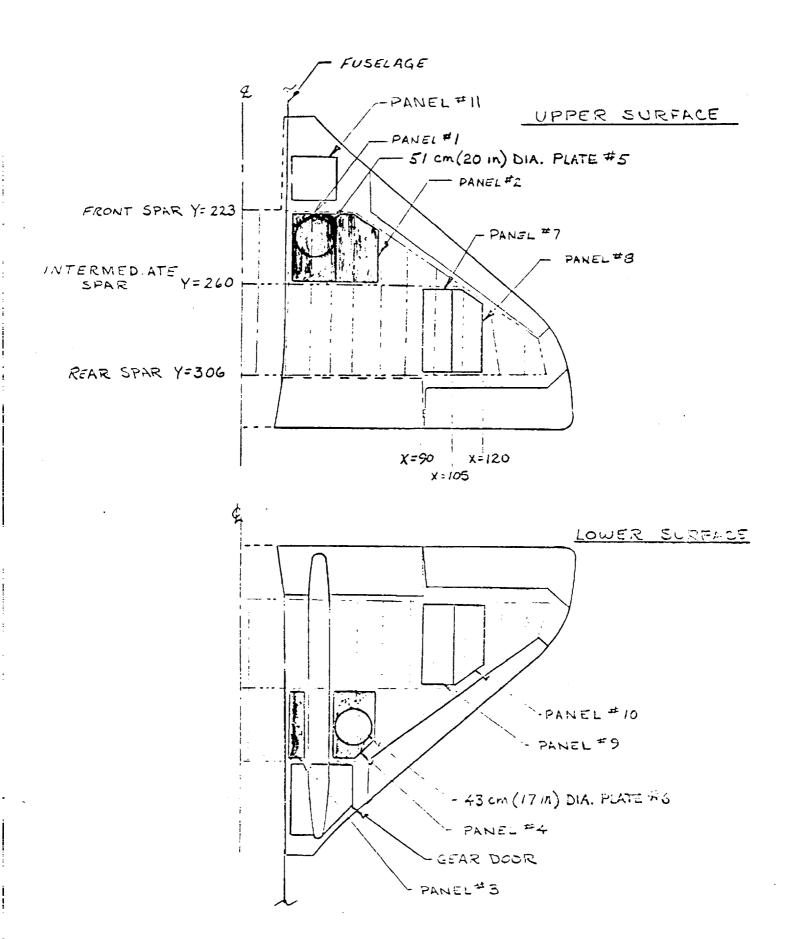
HOLE CONFIGURATION #3. PANELS 1,2,3,64 AND PLATES 566 REMOVED
